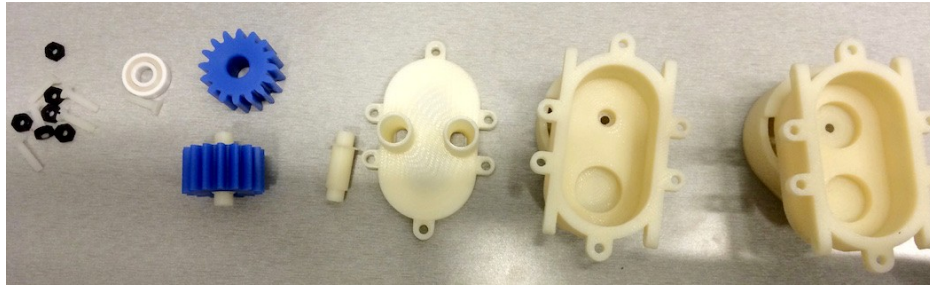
External gear pump. Disassembled view of the gear pump unit, components from left to right: bearings, gears and shafts; lid with inlets/outlets to fish tail; main body with hole for motor shaft.
